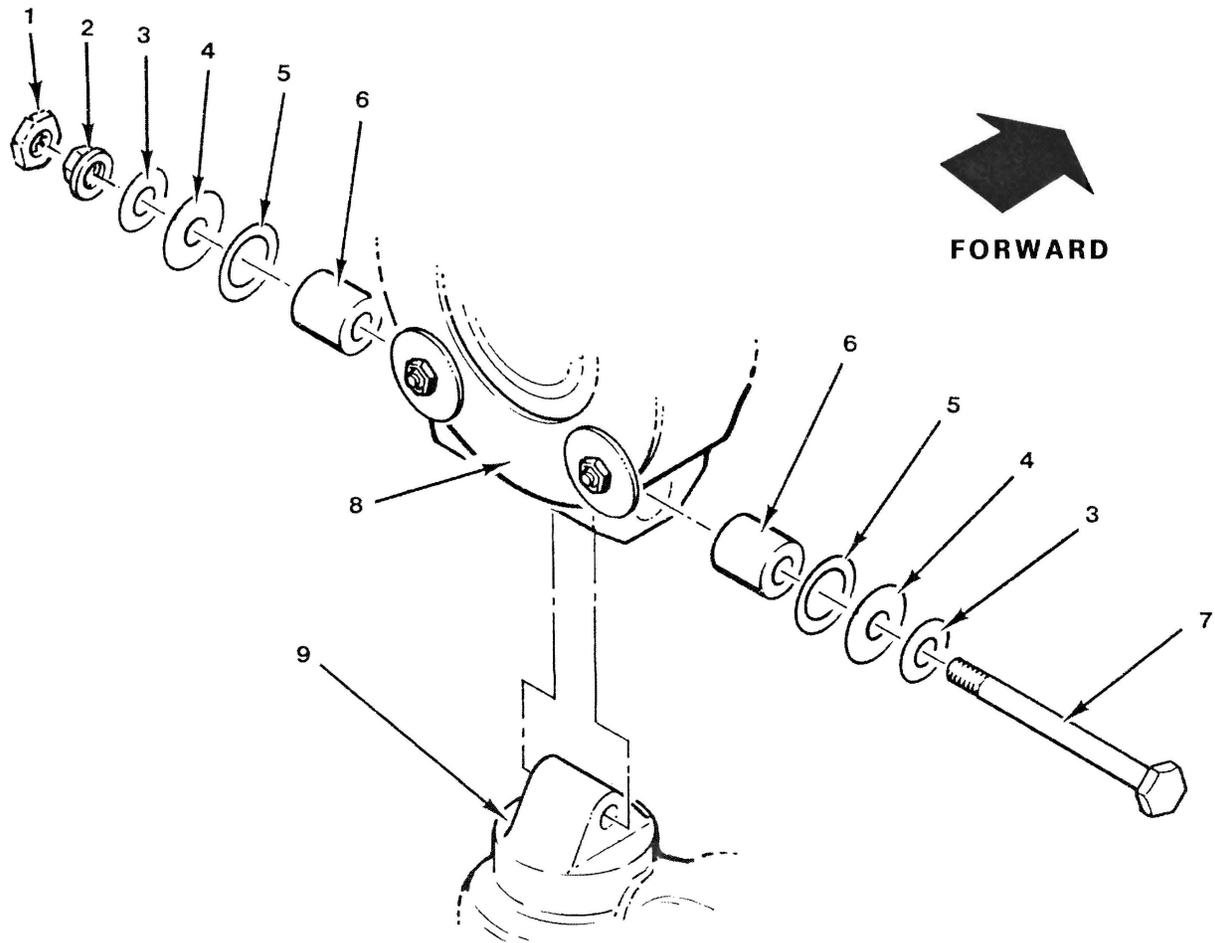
ACTUATOR ASSEMBLY INSTALLATION
